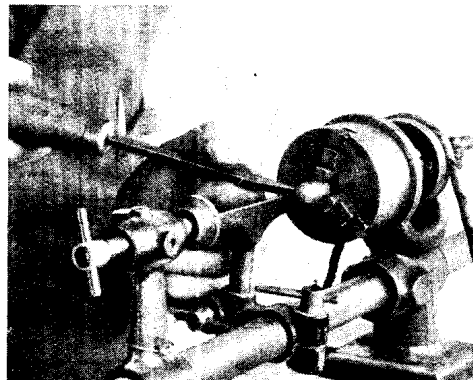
Another method of turning easily is with a hand tool using a small bench lathe with a T rest
